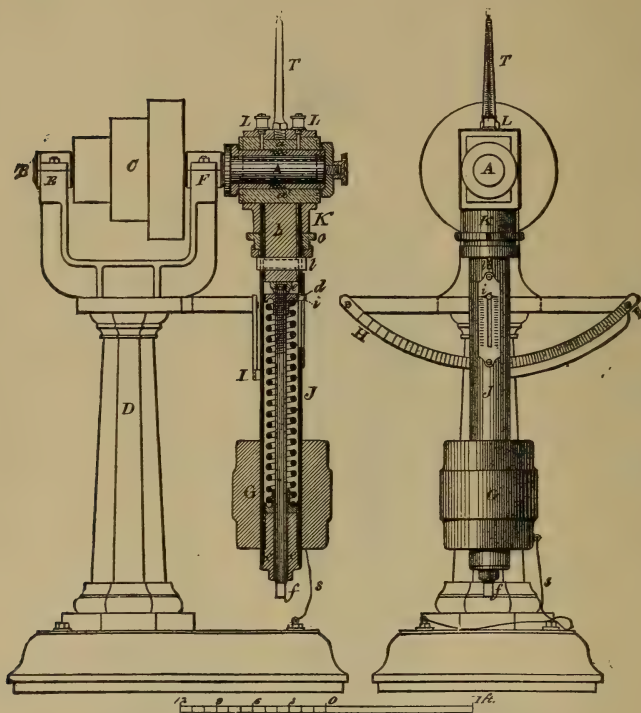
SECTION OF RAILROAD LUBRICANT TESTING-MACHINE.
